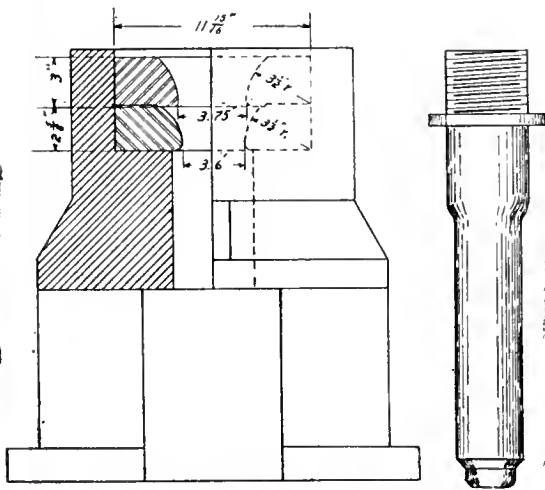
SHRAPNEL BILLET AFTER FIRST DRAWING OPERATION.
